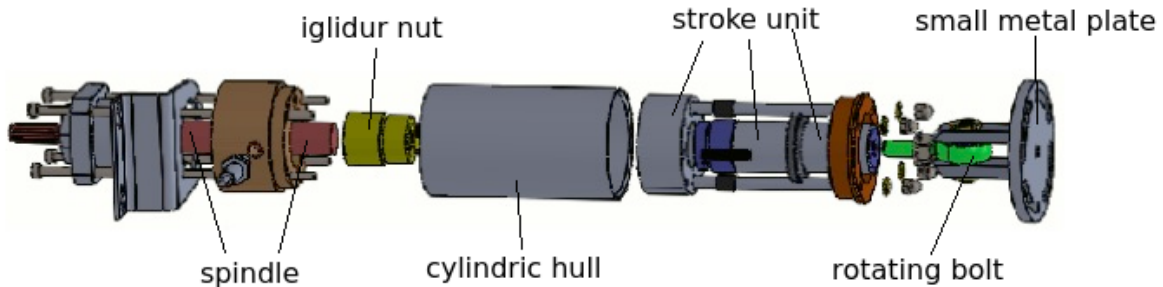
Drawing of the actuator parts. Left in red the spindle, in yellow the iglidur nut and on the right in gray with some blue on the left side is the stroke unit.
